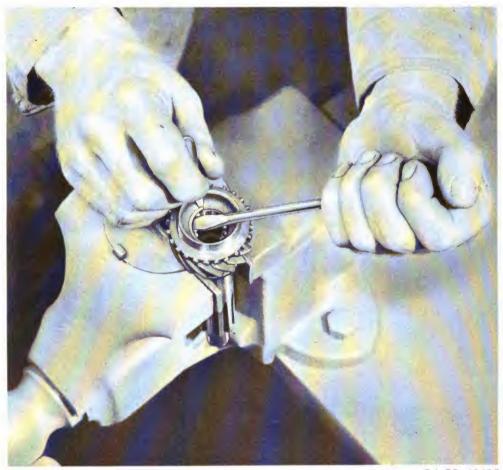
Transmission Gears, Shafts, Bearings, and Shifter Details
